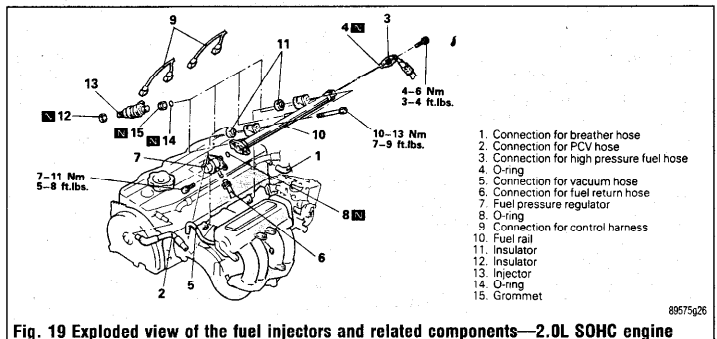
Exploded view of the fuel injectors and related components—2.0L SOHC engine
